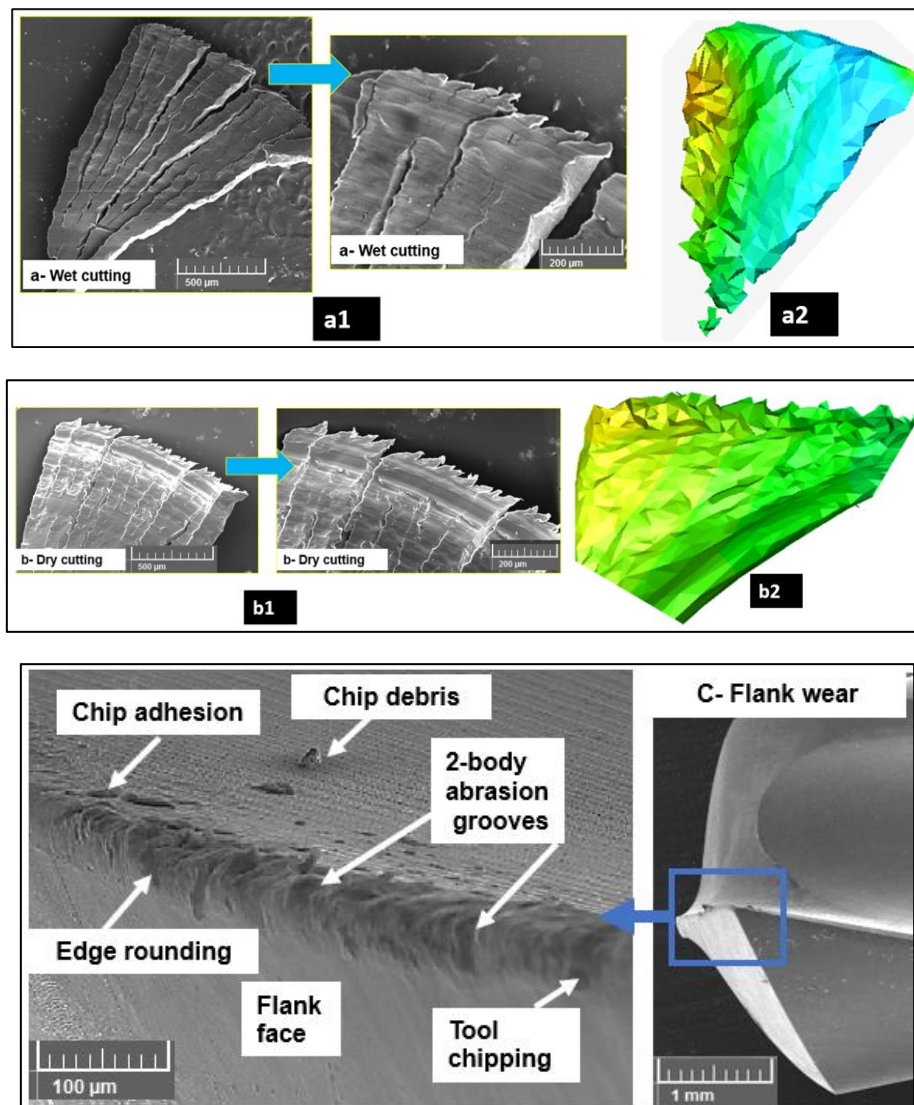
16 Chip morphology of AZ91-15% magnesium foam a) wet machining b) dry machining c) representative tool wear.
